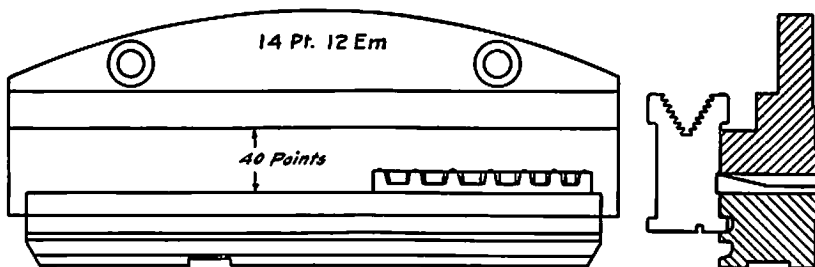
Headletter Advertising Figure Mold. Molds of this type are made to suit the measures desired and require no liners. The mold shown in the illustration is designed for use with type faces punched in the headletter or auxiliary position only, casting 5 to 14 point solid slugs in any length up to 30 ems. Only one point size and length can be cast with the mold cap. The mold illustrated is suitable for casting overhanging characters up to 40 points in height punched in headletter position. Mold assemblies similar to this type are made for casting other ranges of advertising figure work.
